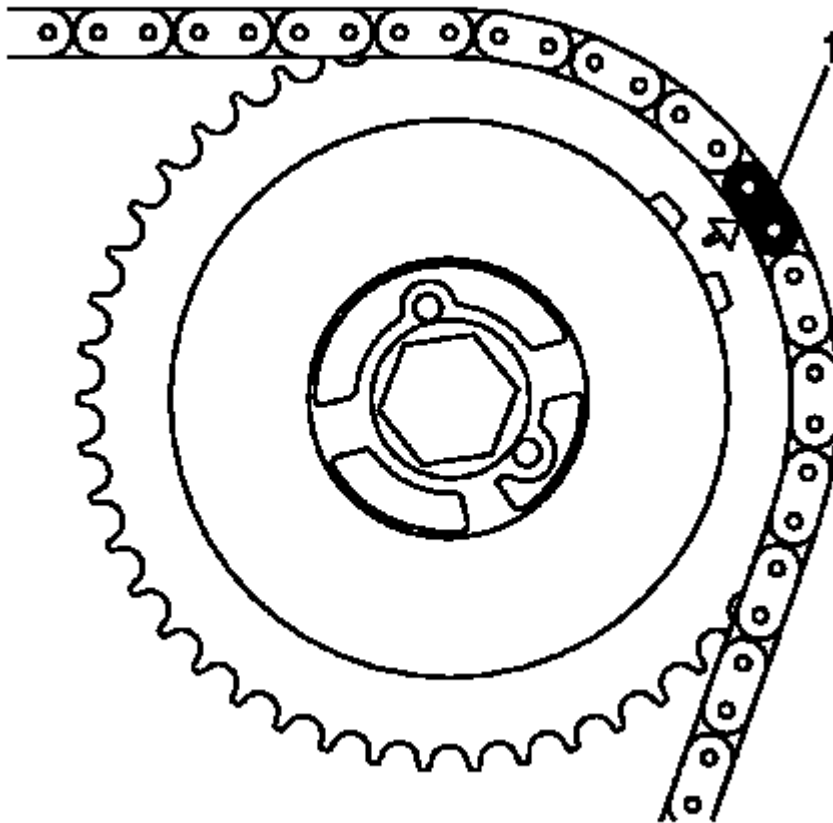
Identifying Proper Exhaust/Intake Camshaft Alignment positions
